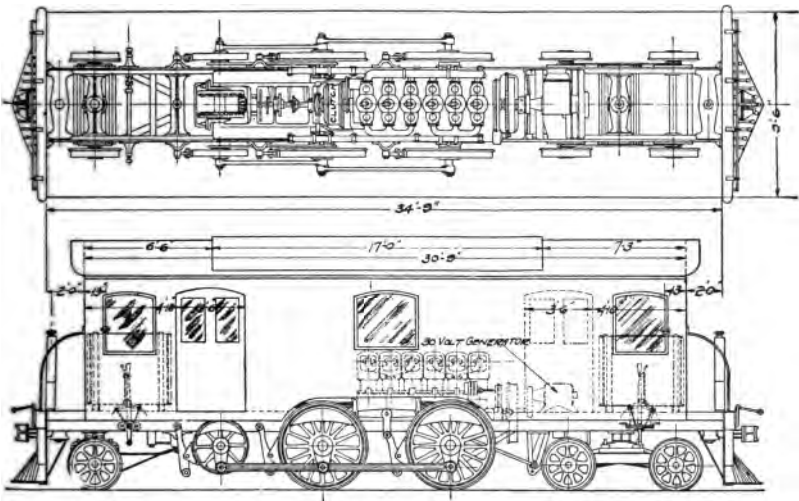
Arrangement of Equipment in Internal-Combustion Engine Locomotive
